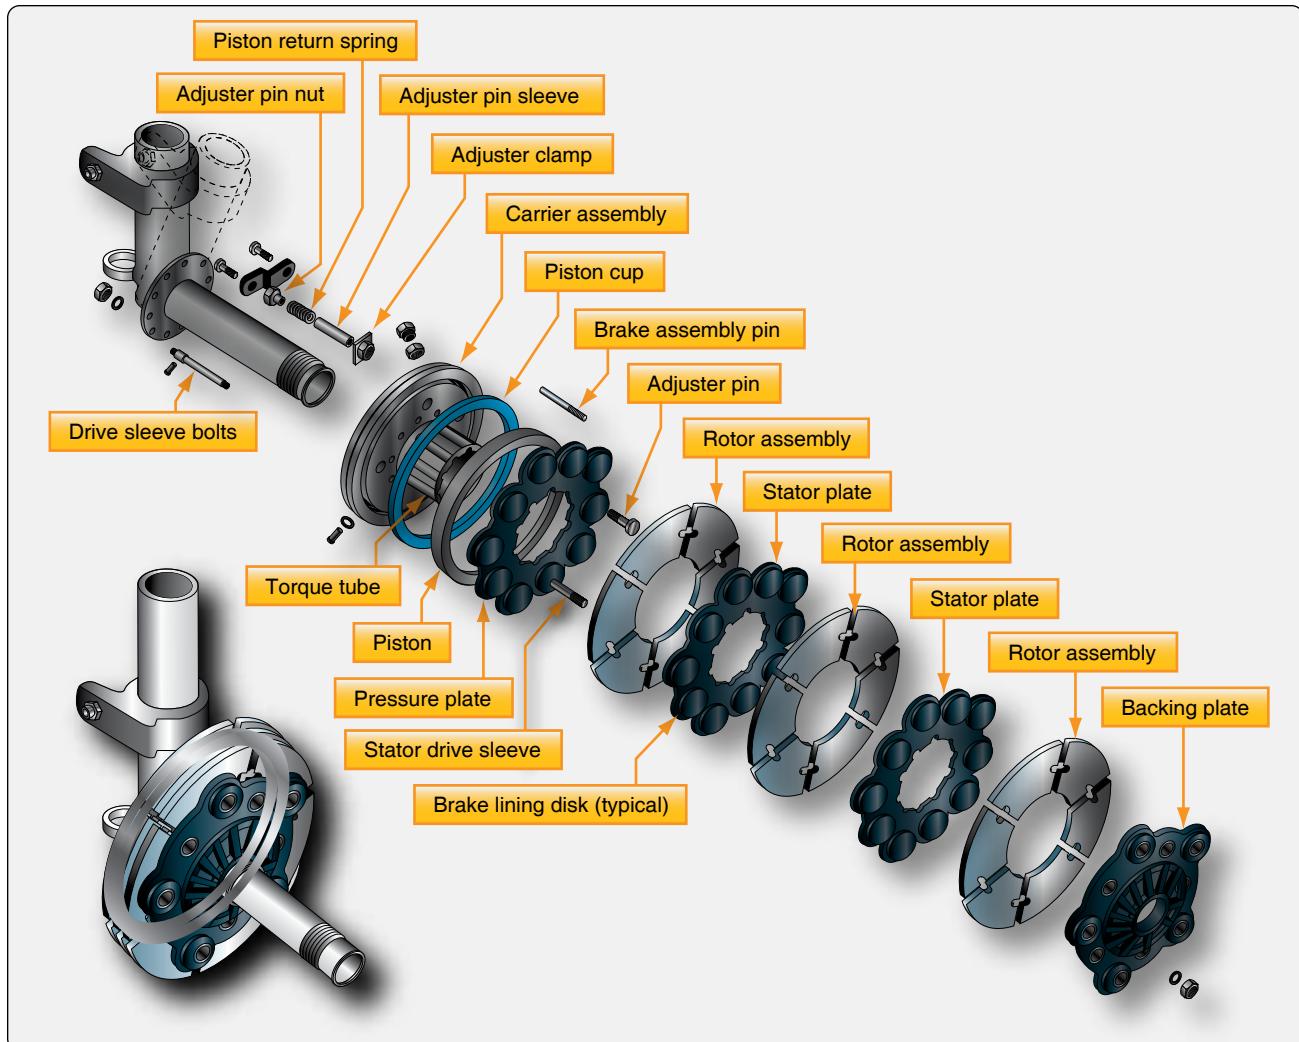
Exploded and detail views of segmented rotor brakes.
